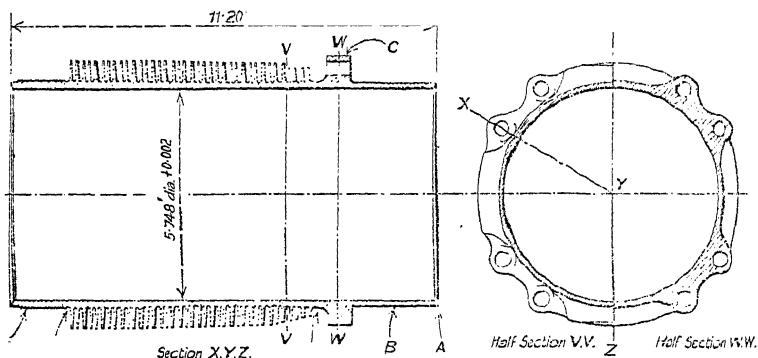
Sectional views of Bristol air-cooled cylinder. (*Machinery.*)
